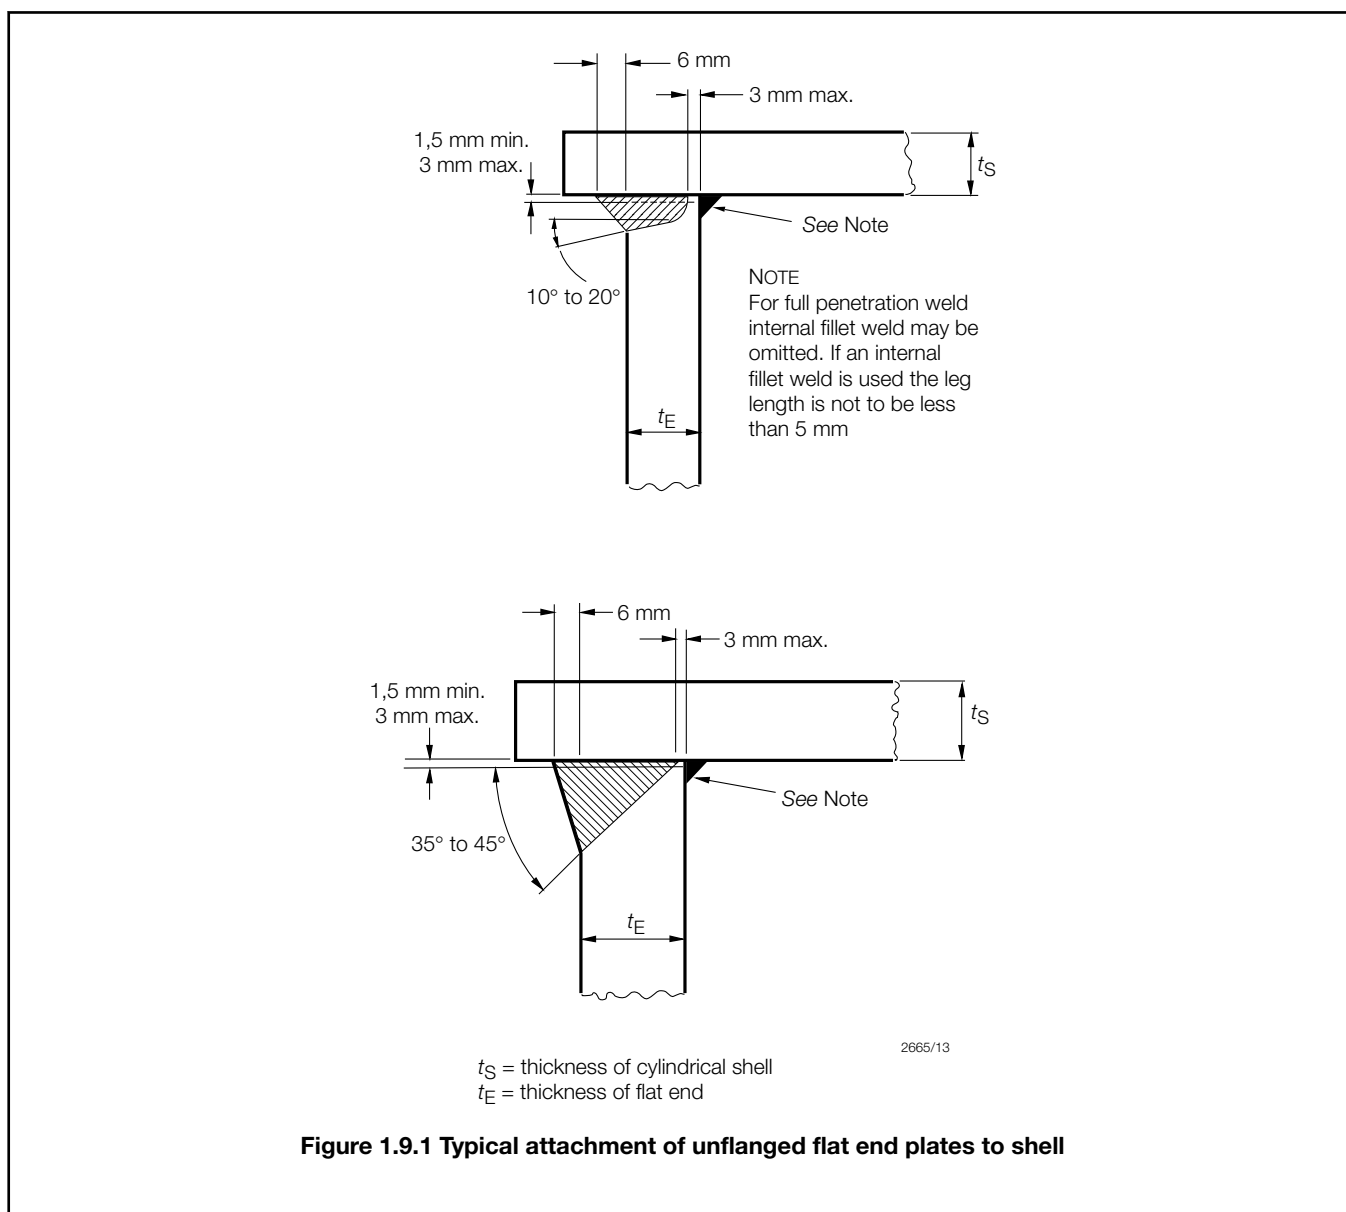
Typical attachment of unflanged flat end plates to shell
